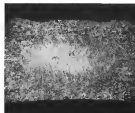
Longitudinal section of spot weld made on two points of S15W sheet without removing the oxide film.
